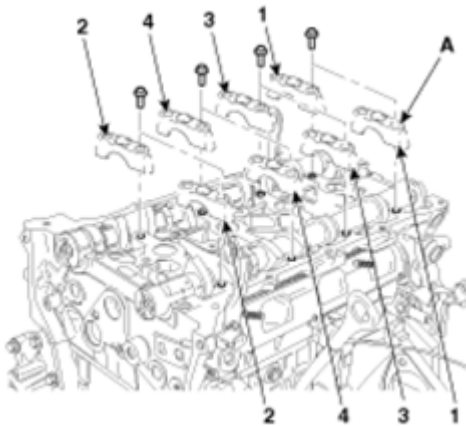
Camshaft Bearing Cap Loosening Sequence
